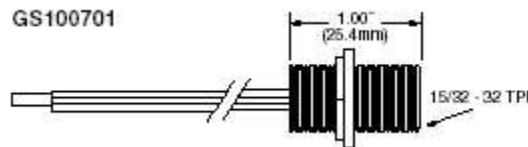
GS100701 Gear Tooth Sensor (Courtesy Cherry Sensor)
